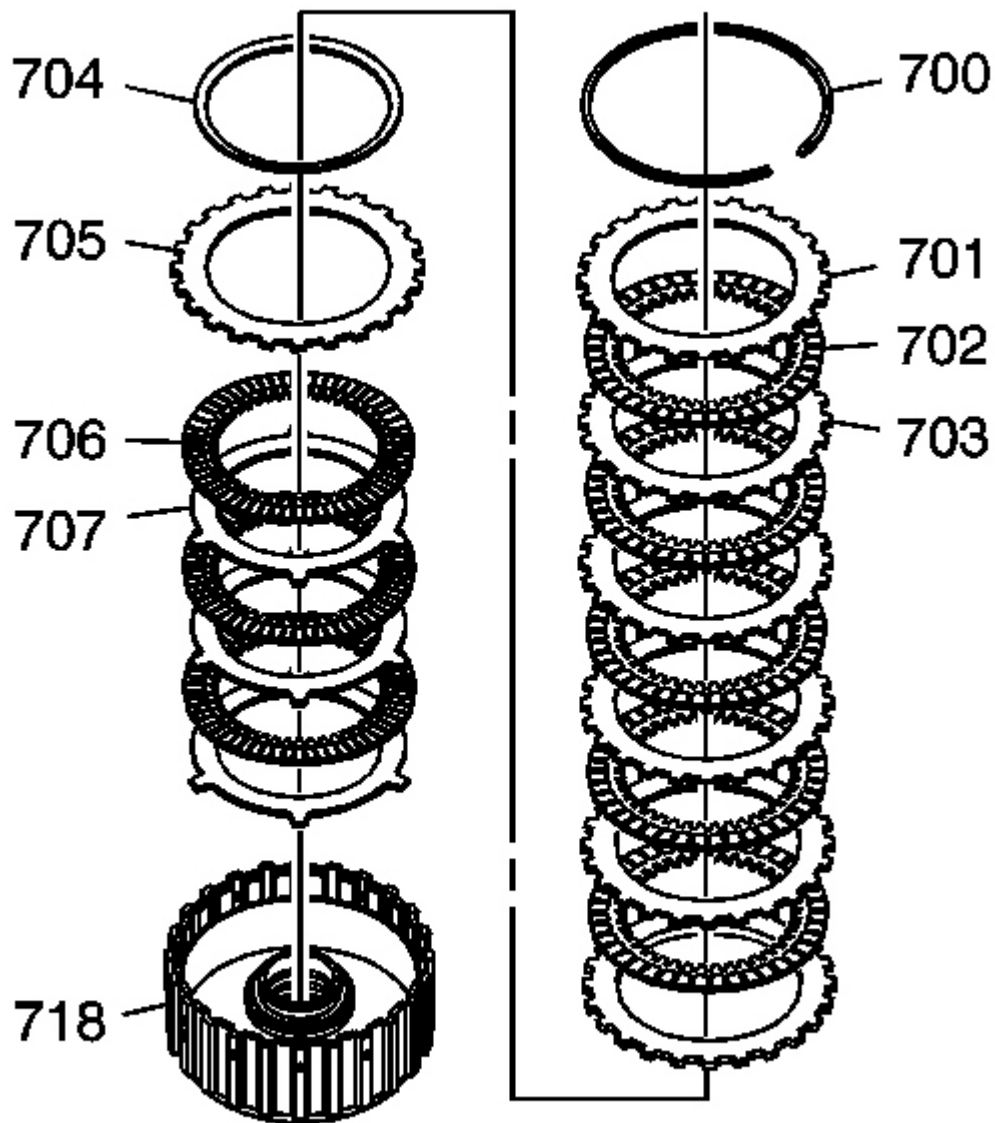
1st Clutch Backing Plate Retaining Ring & Components Removed
